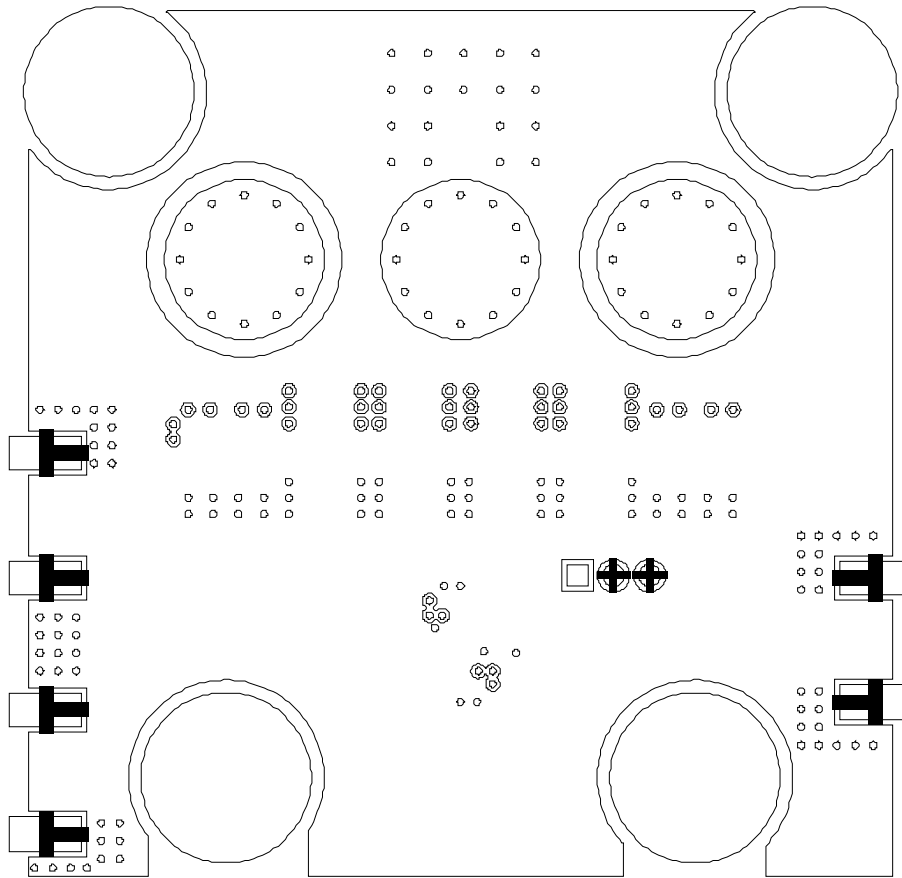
SN65LVDS4EVM Board Layout, GND – Layer 2
